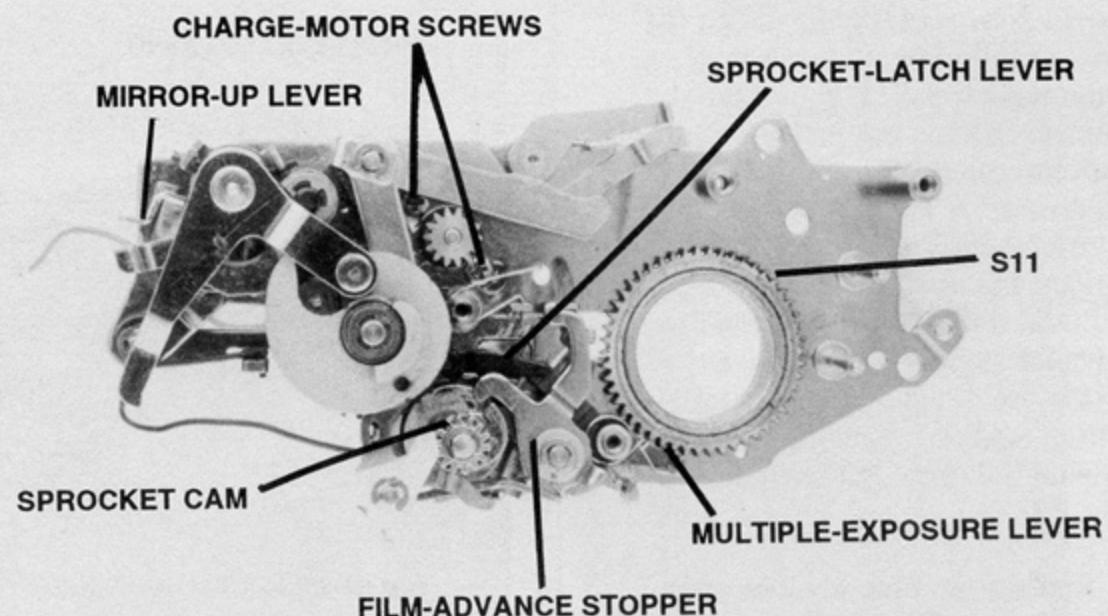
TOP OF FILM-ADVANCE UNIT, INNER FILM-ADVANCE PLATE REMOVED
